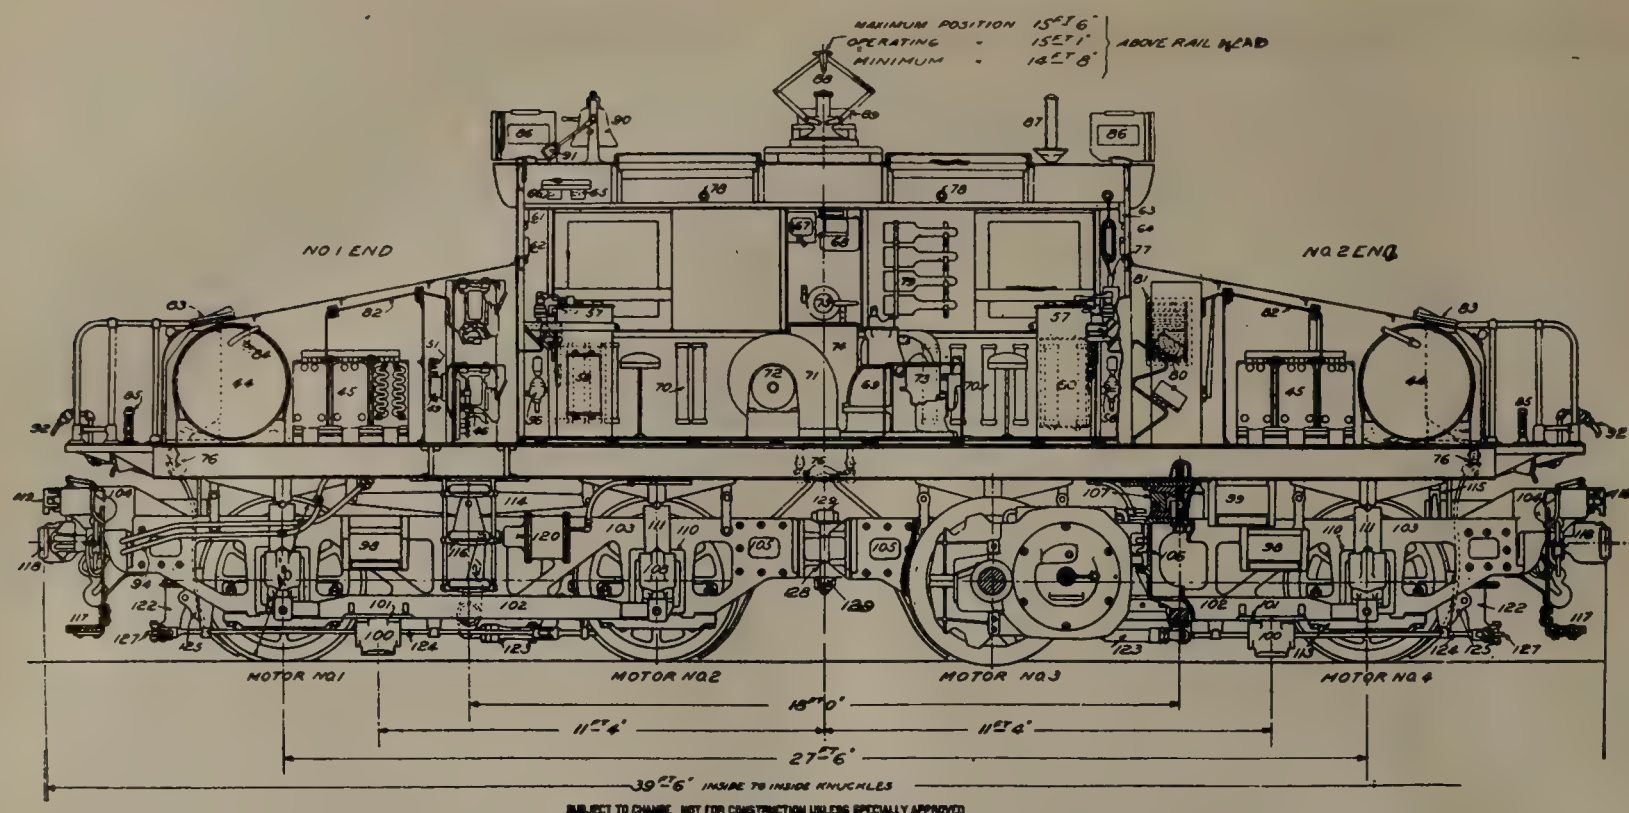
Elevation Showing Arrangement of Apparatus.
